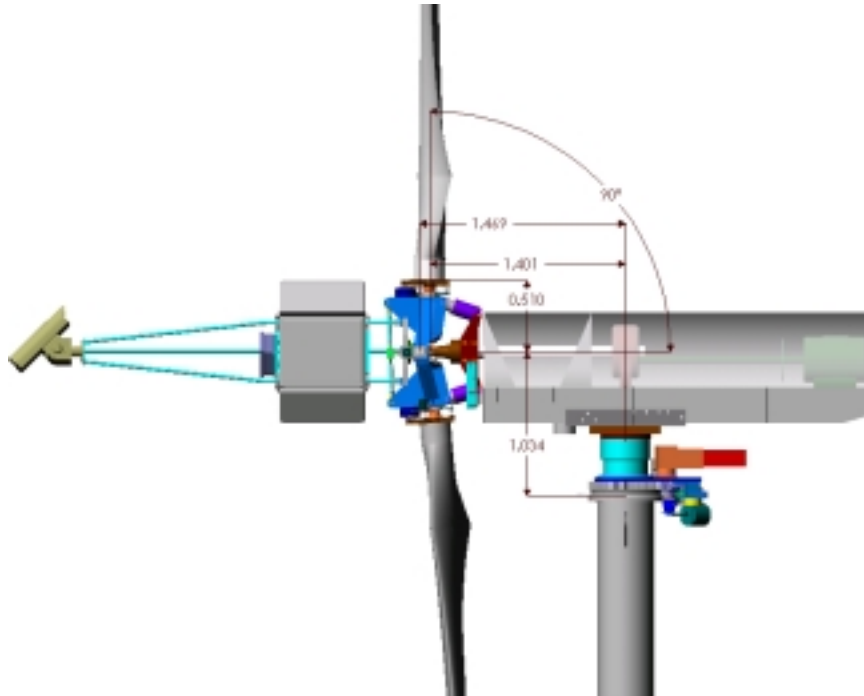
Turbine rotor, 0° cone angle shown (dimensions in meters)
